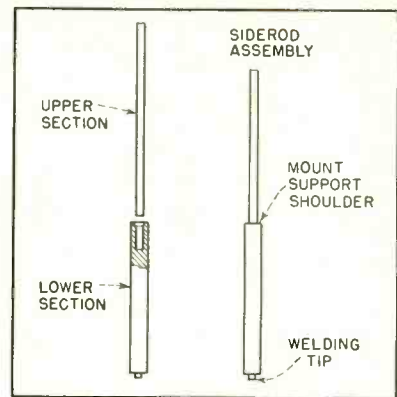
Siderod assembly, showing upper and lower sections and welding tip
